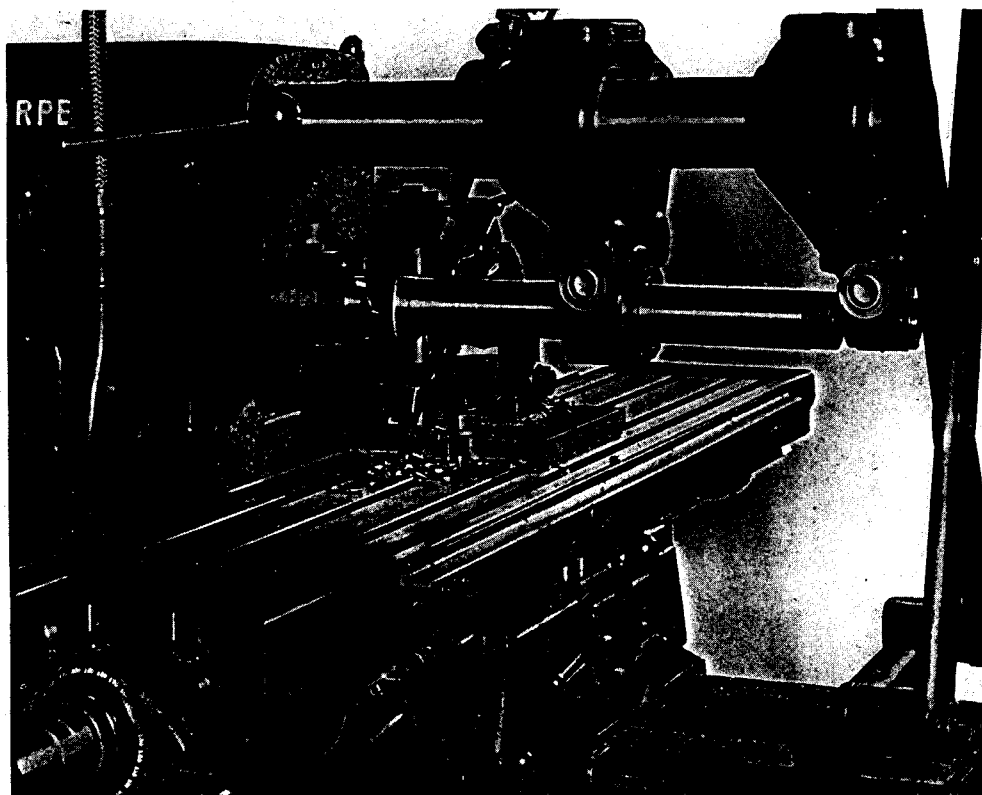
Milling a blind slot in a part held in a fixture. The table is fed to the left, and is stopped by a trip dog at the desired depth of cut. For highest accuracy the cut would be completed by hand feed, using the positive table stop (see page 13) to locate the end of the cut.
